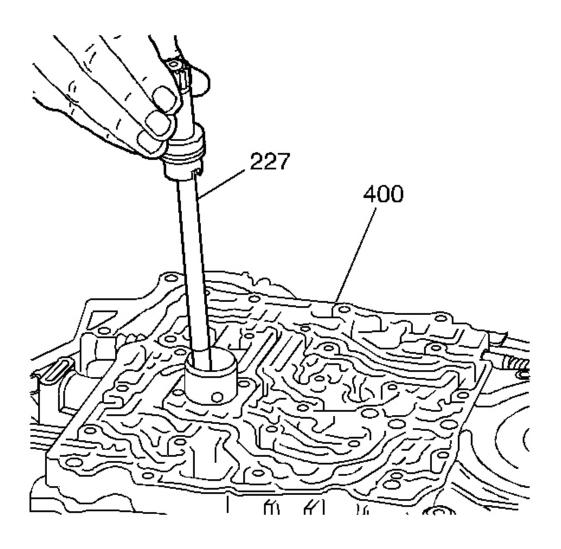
Removing Oil Pump Drive Shaft Assembly Courtesy of GENERAL MOTORS CORP.
